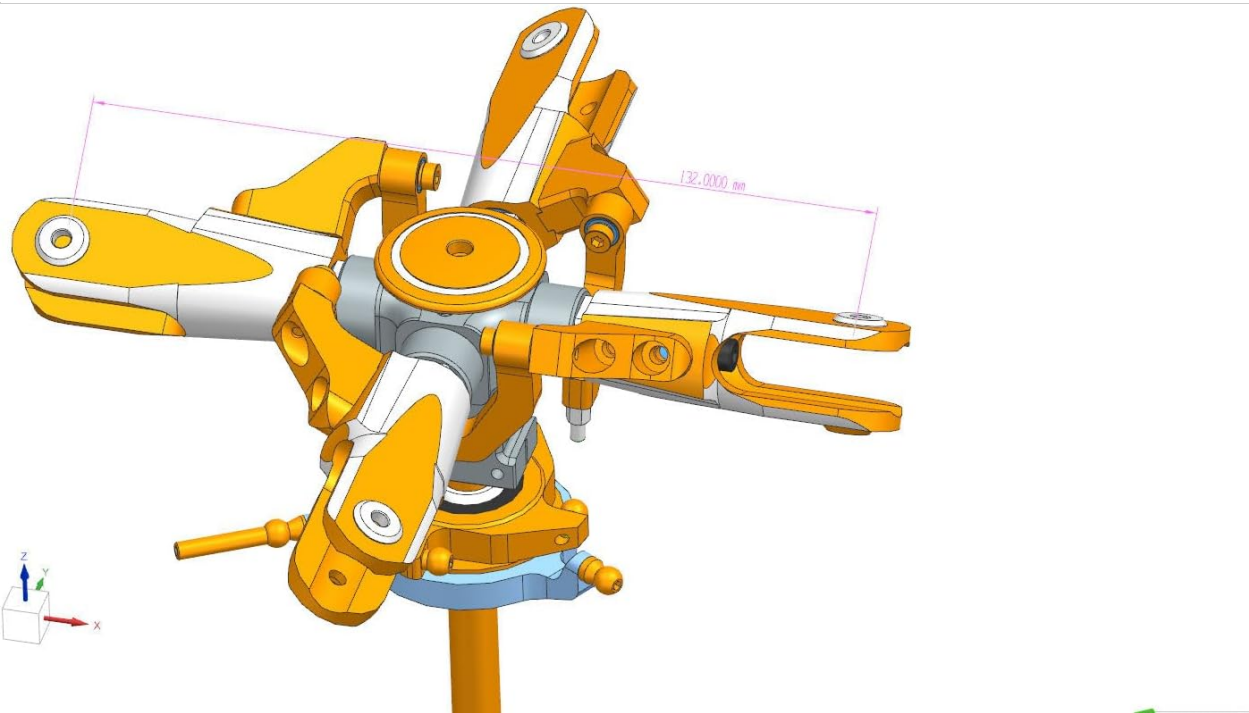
Technical drawing illustrating key dimensions of the rotor head.
